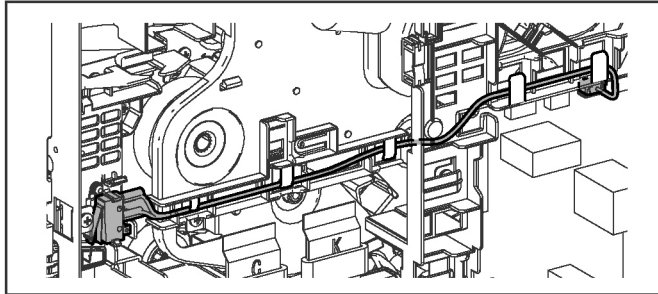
Remove the Rear Interlock Harness Assembly (SFP)
